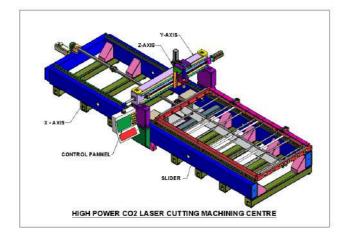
Assembly model of High Power Co2 Laser Machining Centre
